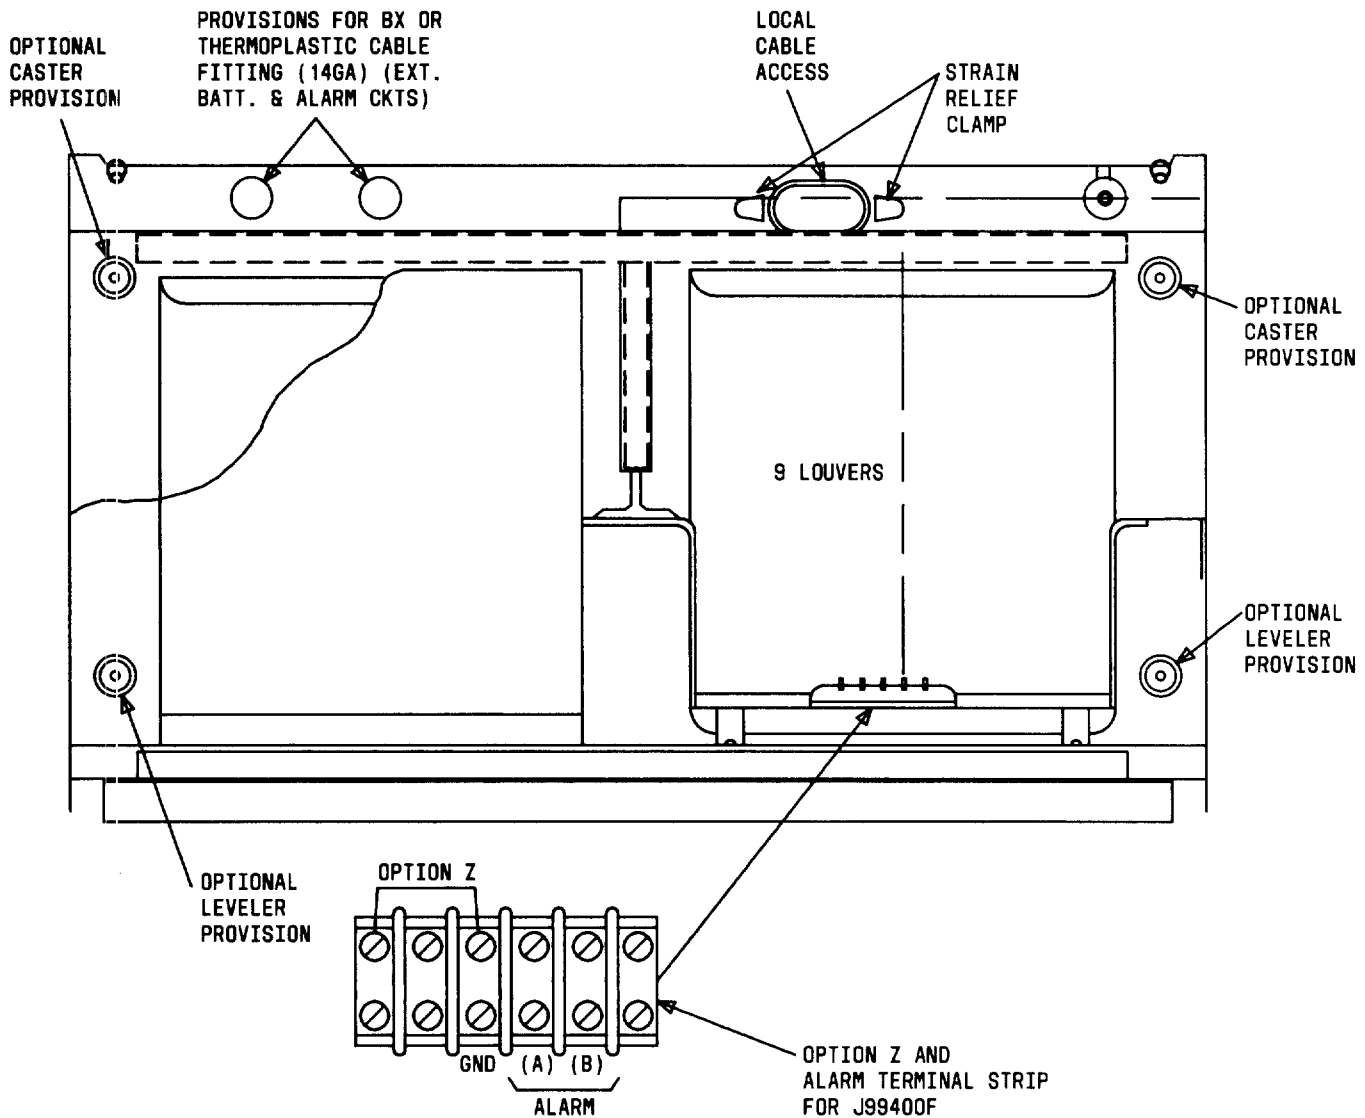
Bottom View of J99400F Showing Cable Access Holes and TB5
